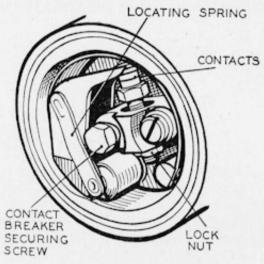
The Lucas Ring Cam Type Contact-breaker
